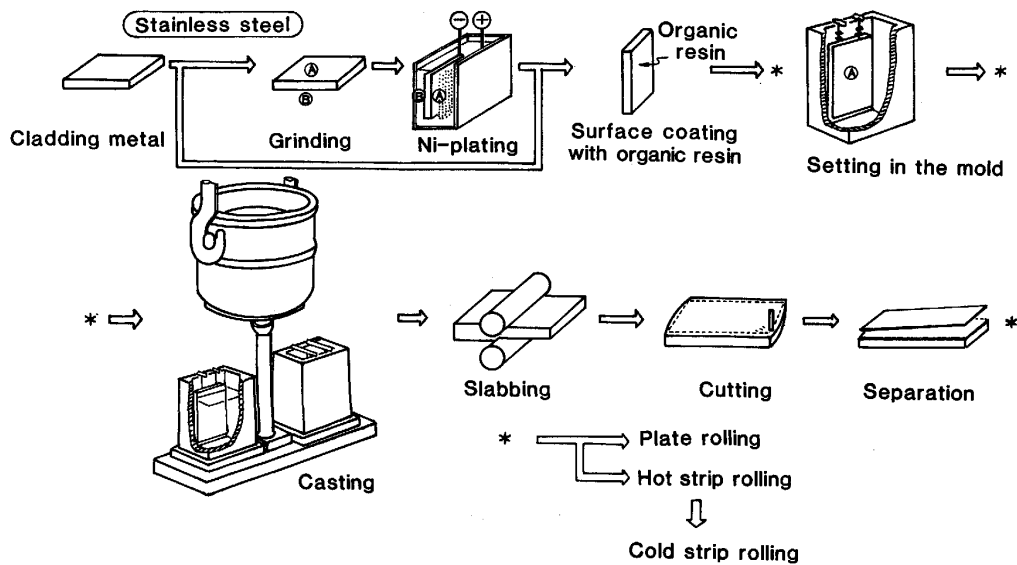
Manufacturing sequence of clad steel by enshrouding cast and rolling process.
